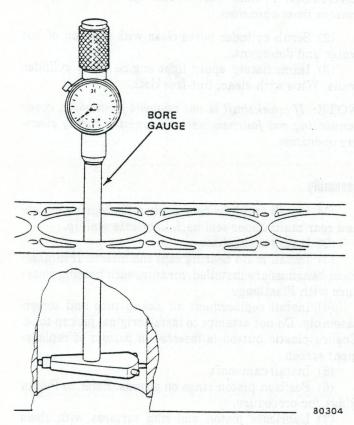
Measuring Cylinder Bore with Bore Gauge
